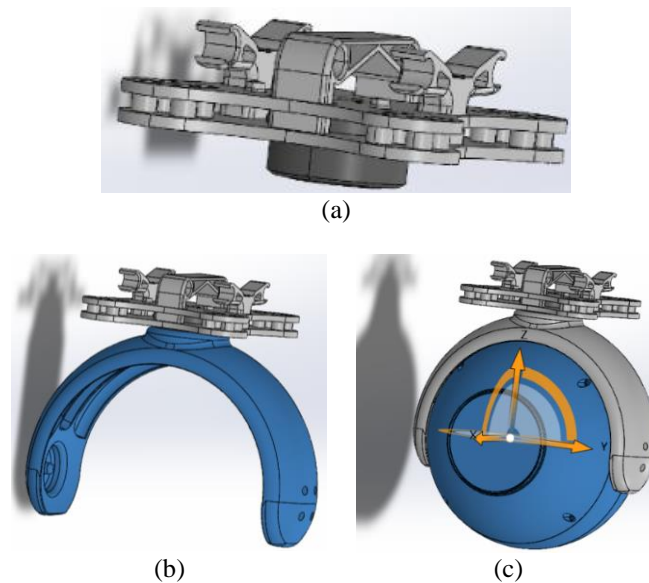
3D CAD model of the proposed gimbals system (a) gimbals base assembly, (b) gimbals yaw assembly, and (c) gimbals pitch assembly
